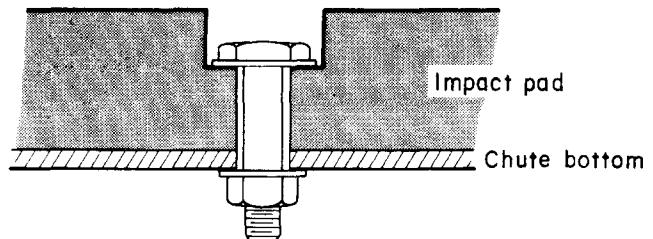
Fastening the impact pad to the bottom of feed chute with countersunk holes in the resilient material.
